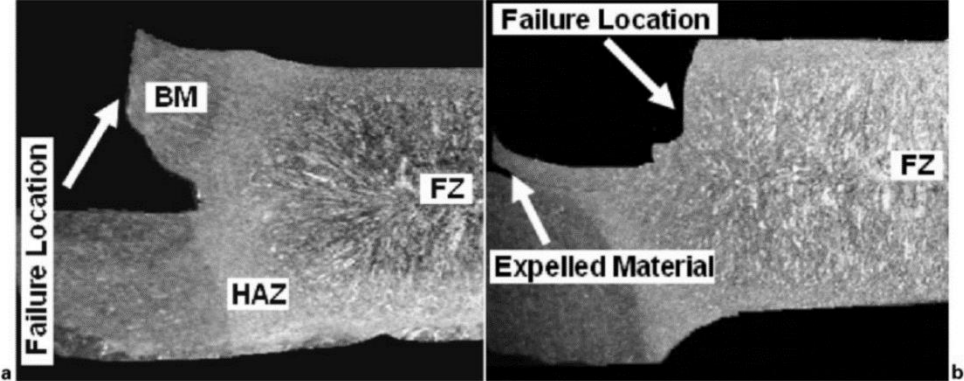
Failure location of spot welds a) without expulsion and b) with expulsion
